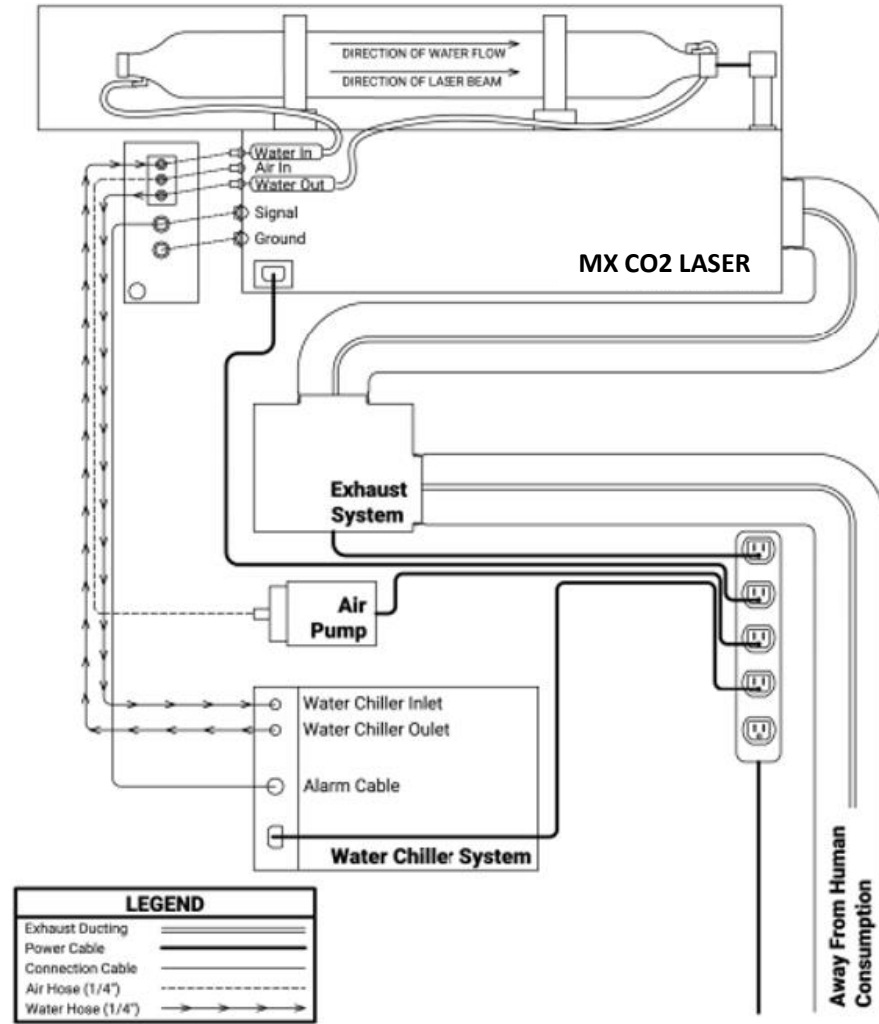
Smartshop Laser/MX Series CO2 Laser Machine.
